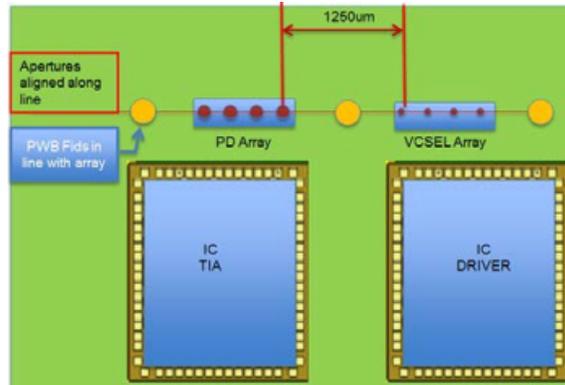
VCSEL/PD Array Assembly Example – General Layout
